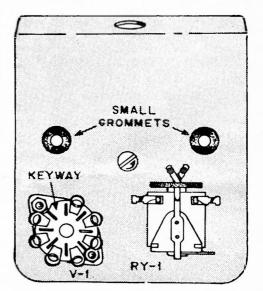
MOUNTING PARTS ON THE SUB-CHASSIS
